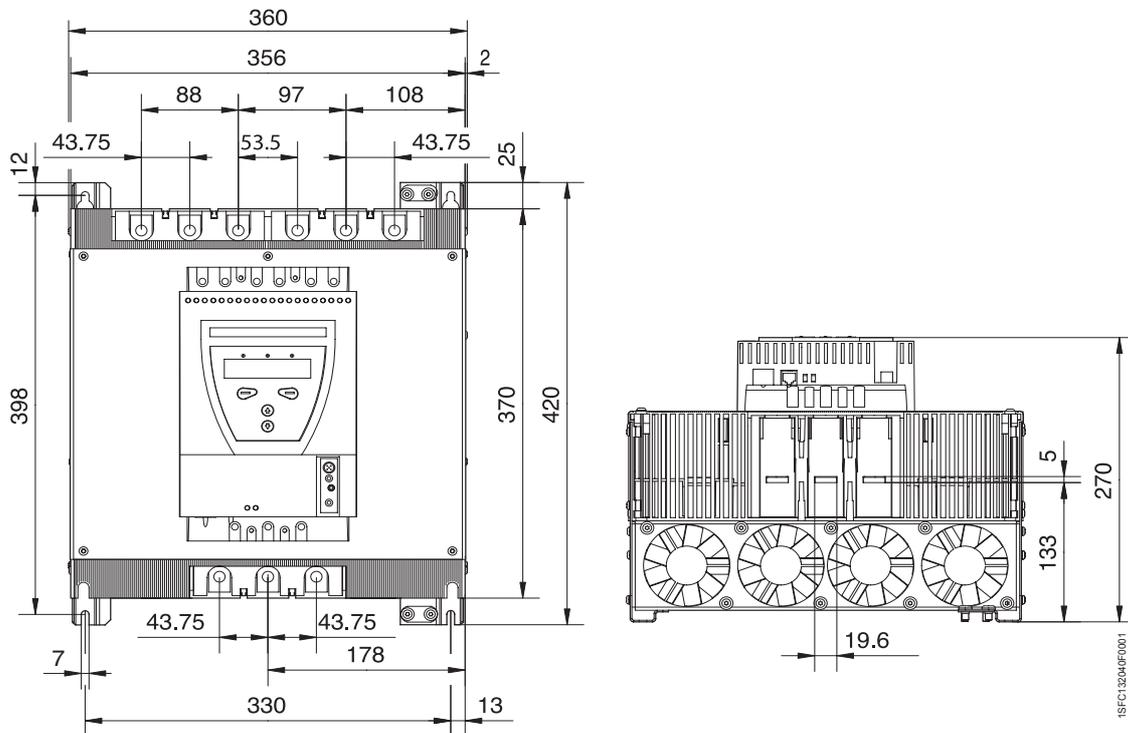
Dimensions PST175..300 (mm) (1 mm = 0.0394 in)
